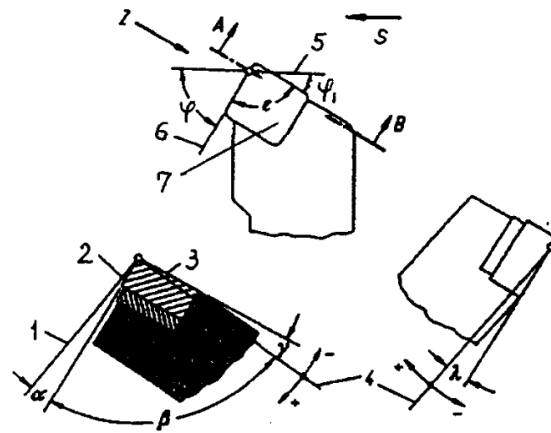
Angles characterizing the cutting blade geometry, where: L – plane of the cutting edge of the tool; 2 – flank; 3 – chip surface; 4 – plane parallel to the basic plane of the tool; 5 – working plane; 6 – main cutting-edge setting plane; 7 – quick-changeable cutting insert; α – back angle; β – wedge angle; φ – main setting angle; ε – apex angle; λ – inclination angle of the main cutting blade; φ_1 – auxiliary setting angle.[21].
